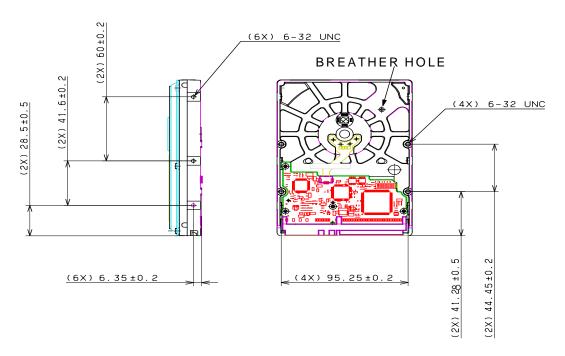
Bottom and side of 40GB - 80GB view with breather hole and mounting hole locations
